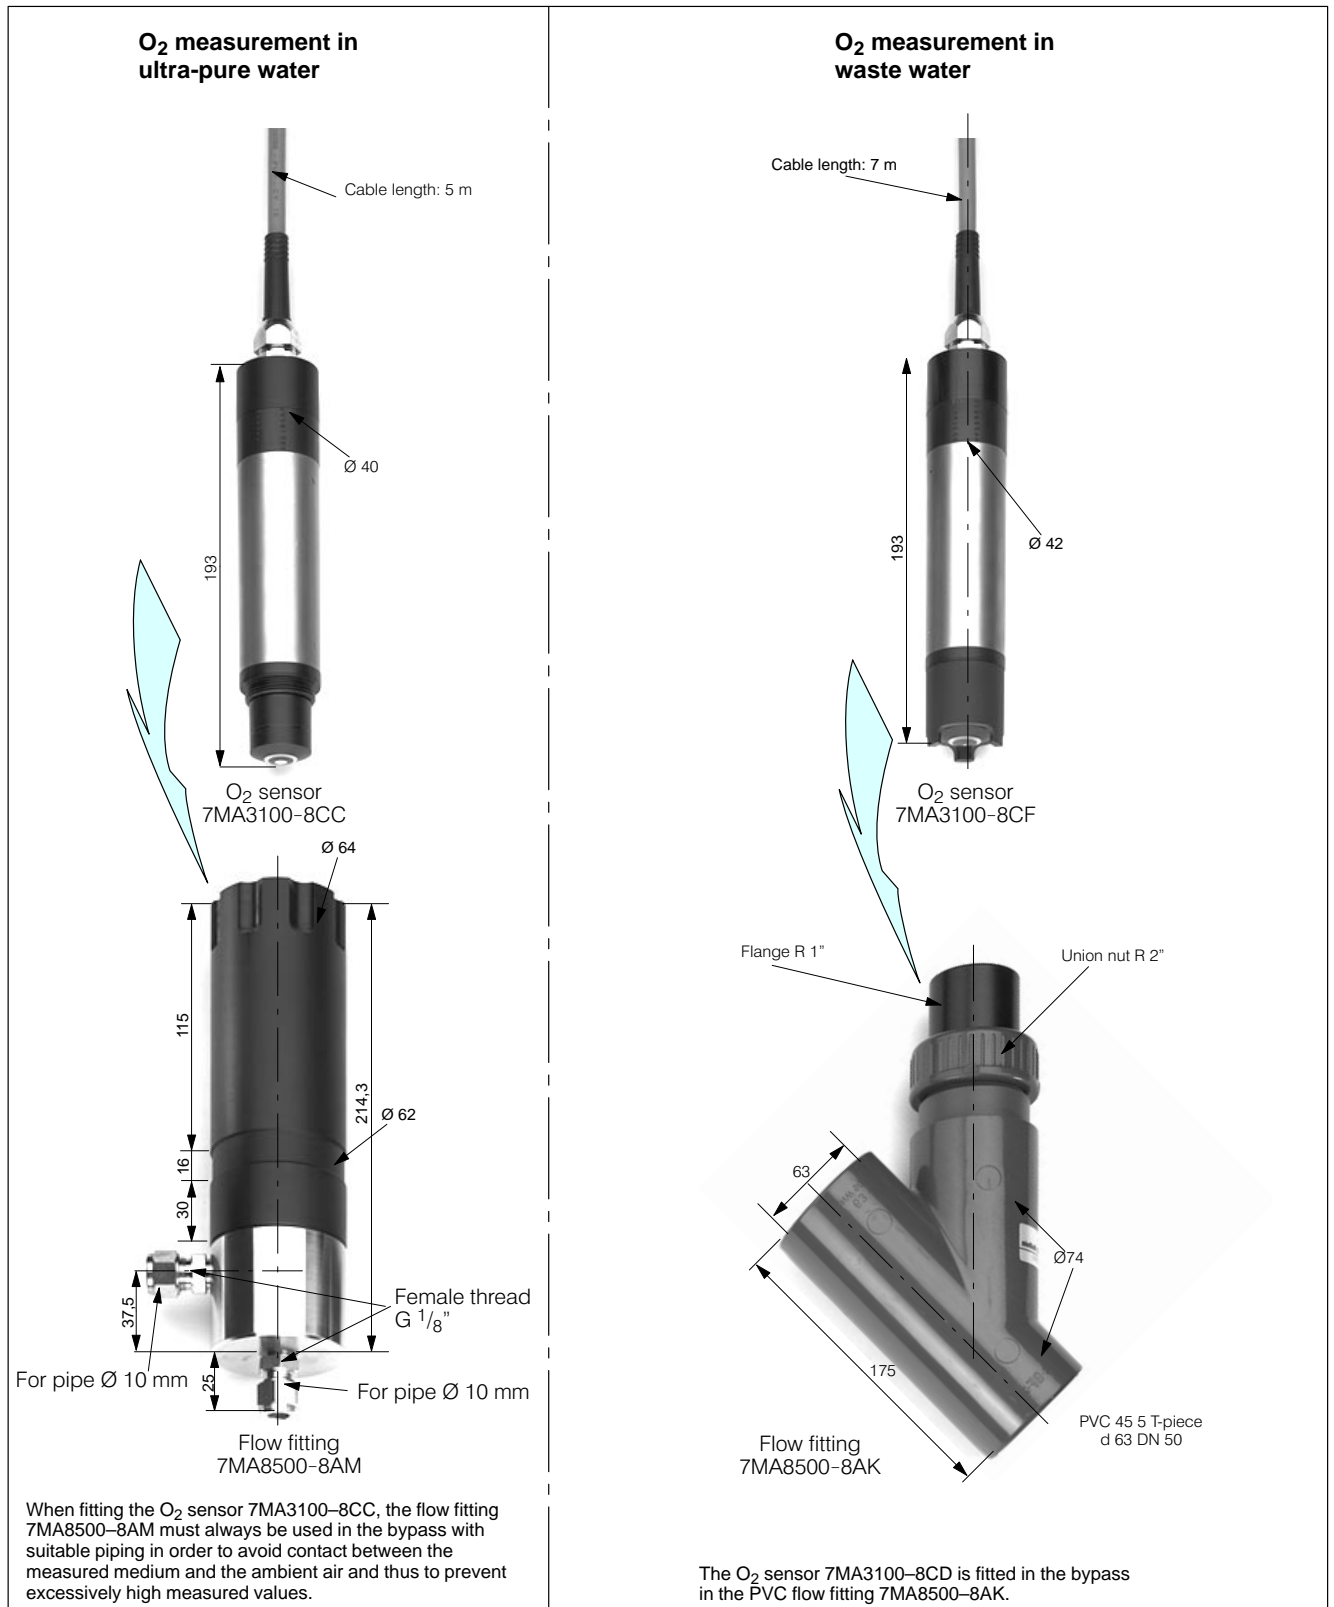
/17 Oxygen sensors, matching fittings and accessories, dimensions in mm
